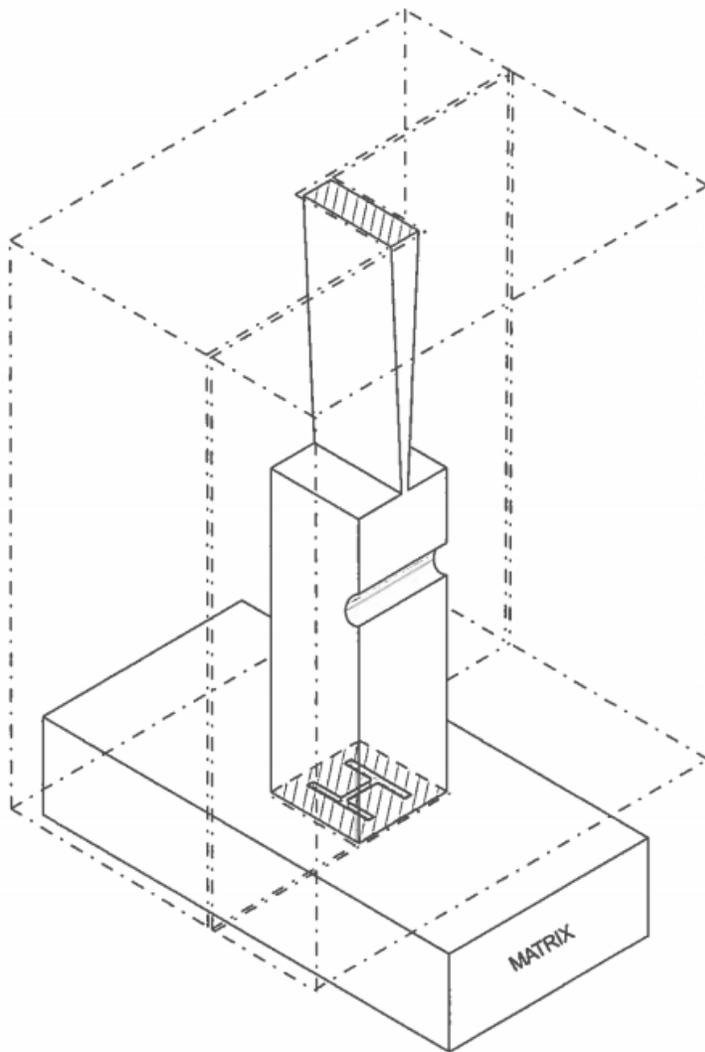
Conceptual drawing of Gutenberg's method of mass-producing type. In this concept drawing the open-bottomed mold is shown in phantom lines. The mold is shown in place on a matrix of arbitrary dimensions. The letter to be cast (an H in this example) has been heavily embossed into the matrix. Type metal is poured into the cavity shown in solid lines. After the mold is opened, the wedge-shaped sprue is broken off. A line of type will be assembled, guided by a rail which engages the semicircular groove on the side of the completed type bit.
